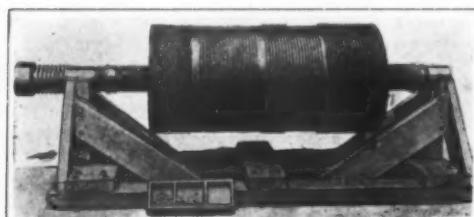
Cradle in which the rotor was supported to remove the old blades.
